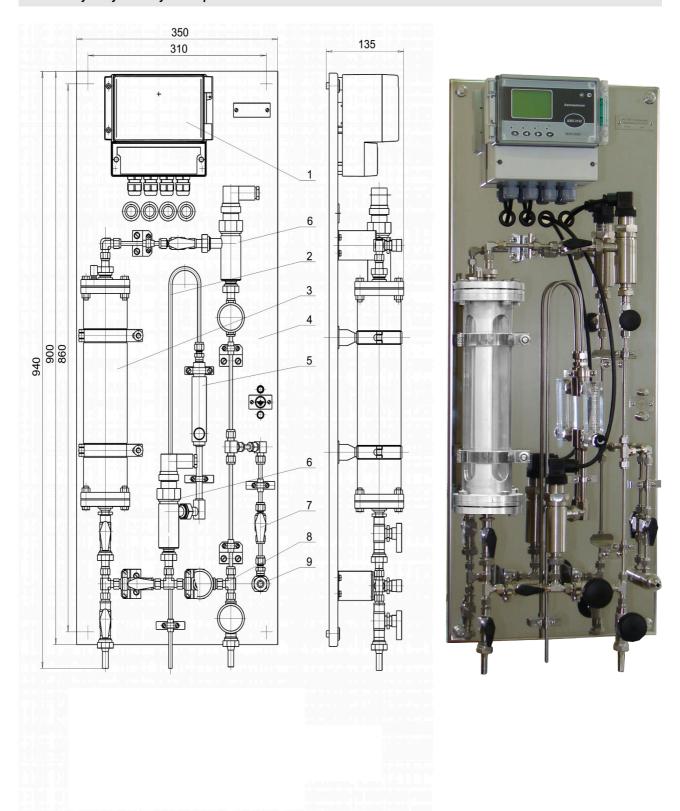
Hydraulic panel with cation-type H-filter for C-3122.x.P (execution HP3122P).
